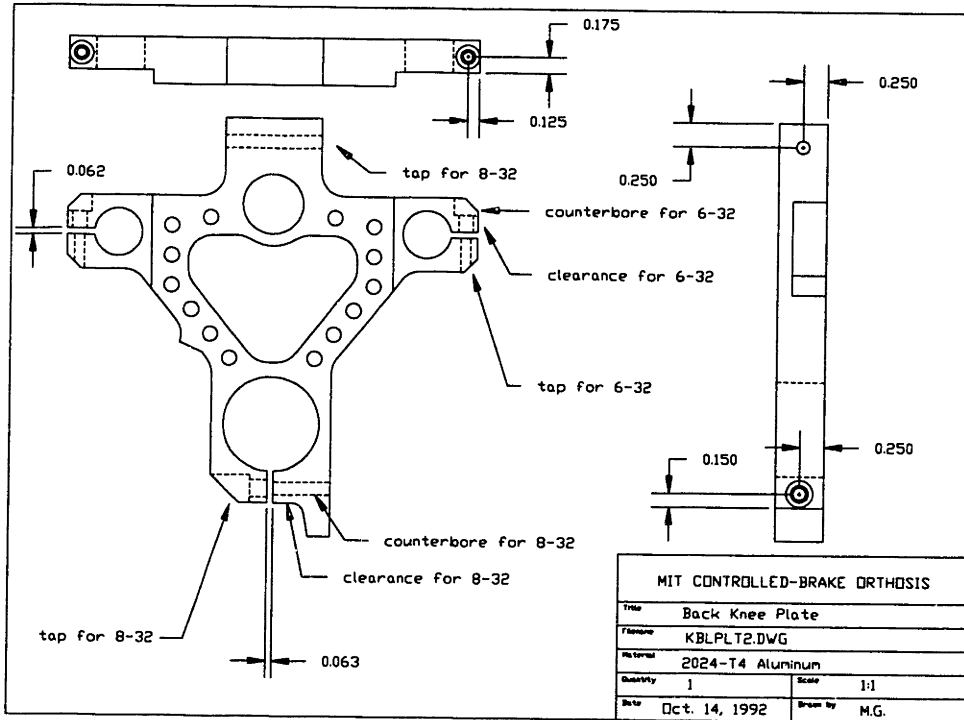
Back plate for left knee gear housing (drawing 2 of 2).
